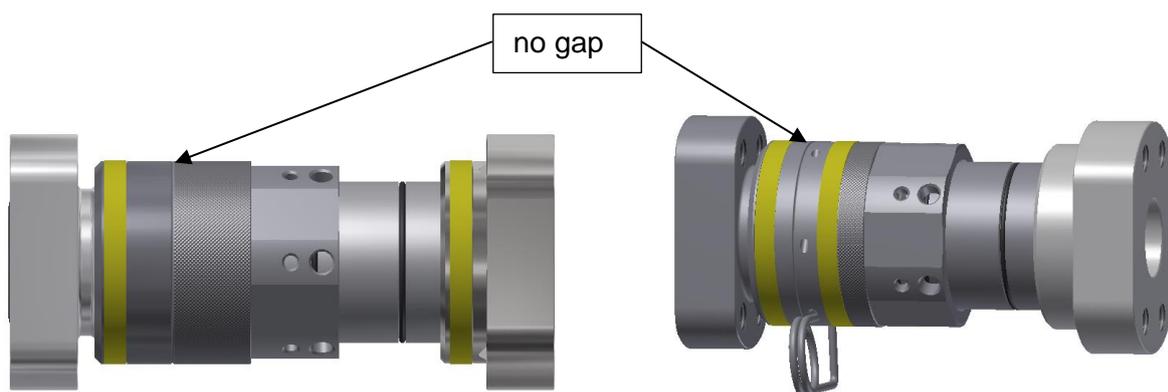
Coupling process. Left: positioning the female coupling. Right: Push the threaded sleeve forward and use a tool to tighten to the stop.
